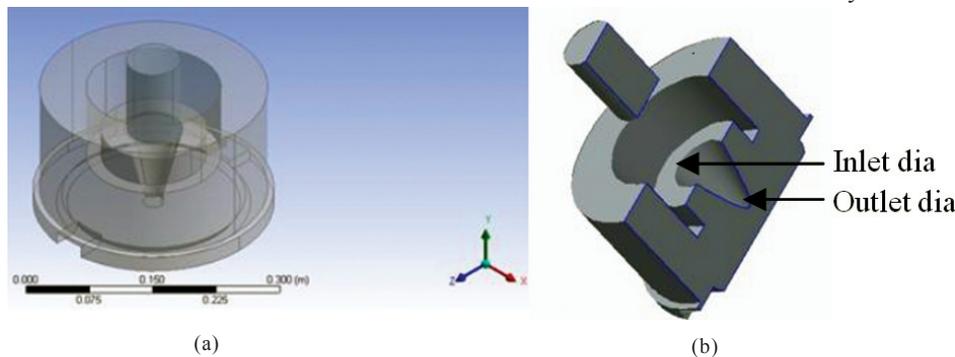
(a) 3D model and (b) Cut section of die-billet assembly.
